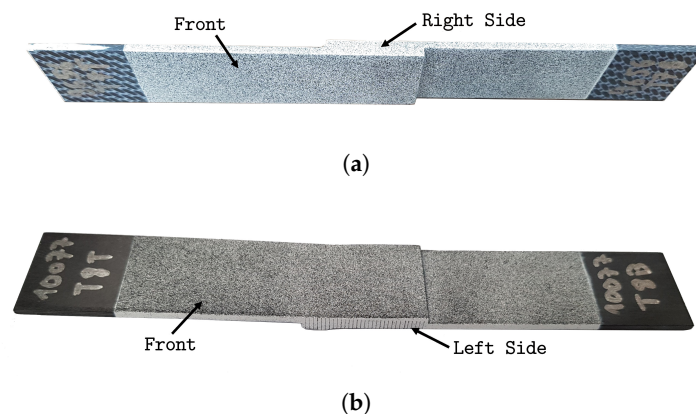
Images of (a) induction-welded specimen A2 and (b) conduction-welded specimen G3.
